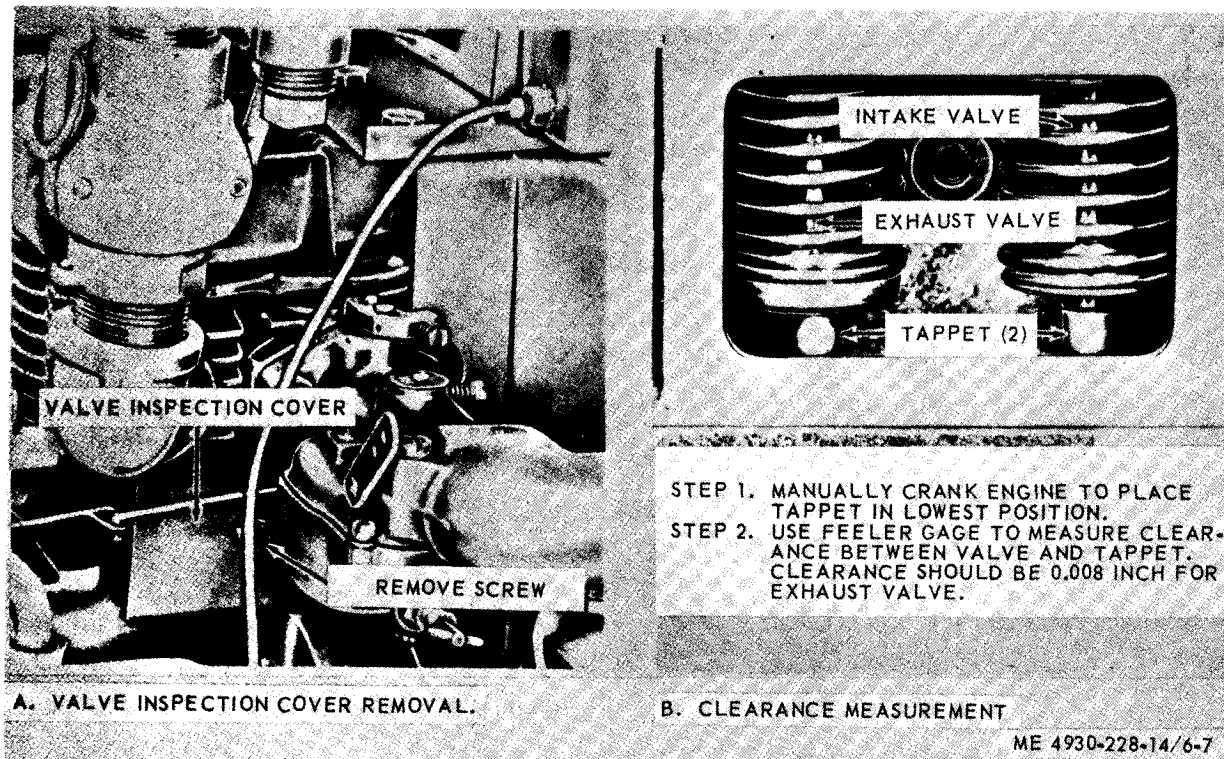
Valve inspection cover removal and valve clearance measurement.
